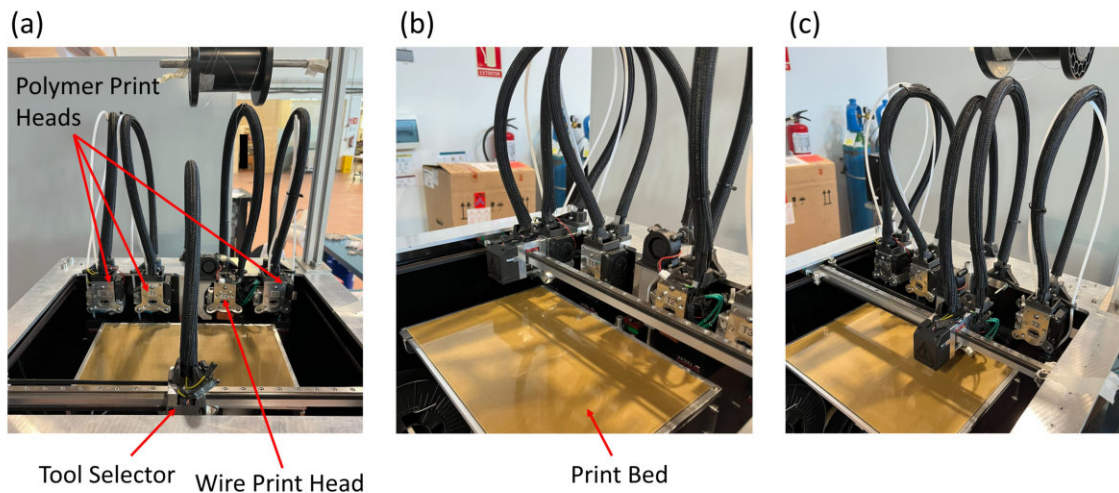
(a) Printer in the 'homed' condition, all print heads and the tool selector are docked in position. (b) Tool selector has engaged 'T0', the polymer print head. (c) Tool selector has disengaged the polymer print head and engaged the wire print head 'T2'.
